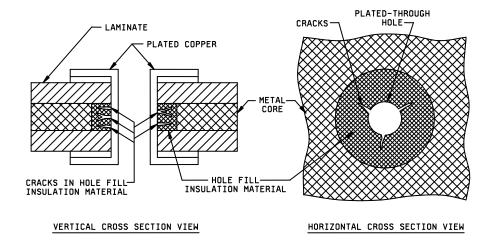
Insulation material cracks; metal cores or heat sink planes.
